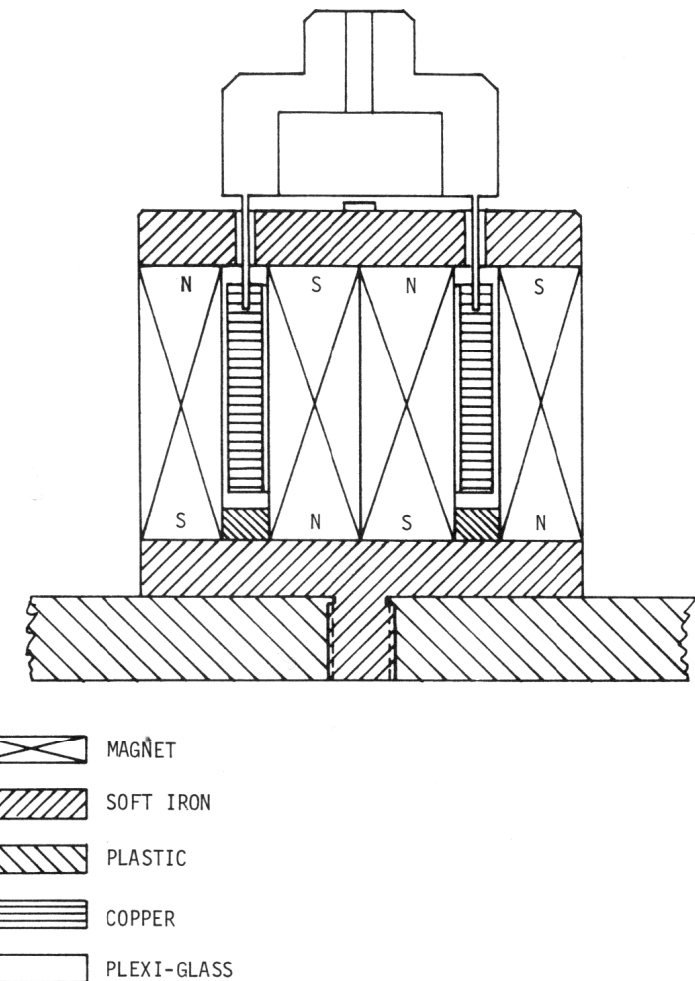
Drawing of the counter-moving double magnet SIBERIAN COLIU machine.
